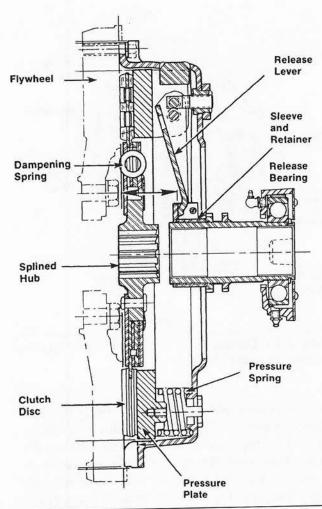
Cutaway of a Lipe single-plate, pull-type clutch. (Courtesy of Haldex Brake Products, Inc.)
